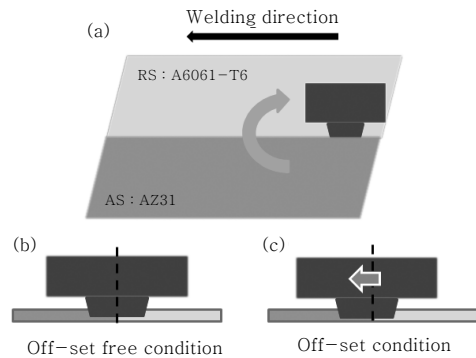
Schematic illustration of the friction stir welding process and tool plunge position
